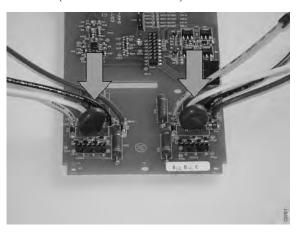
MOV location on Interface PCB (37 kW ~ 55 kW models)
